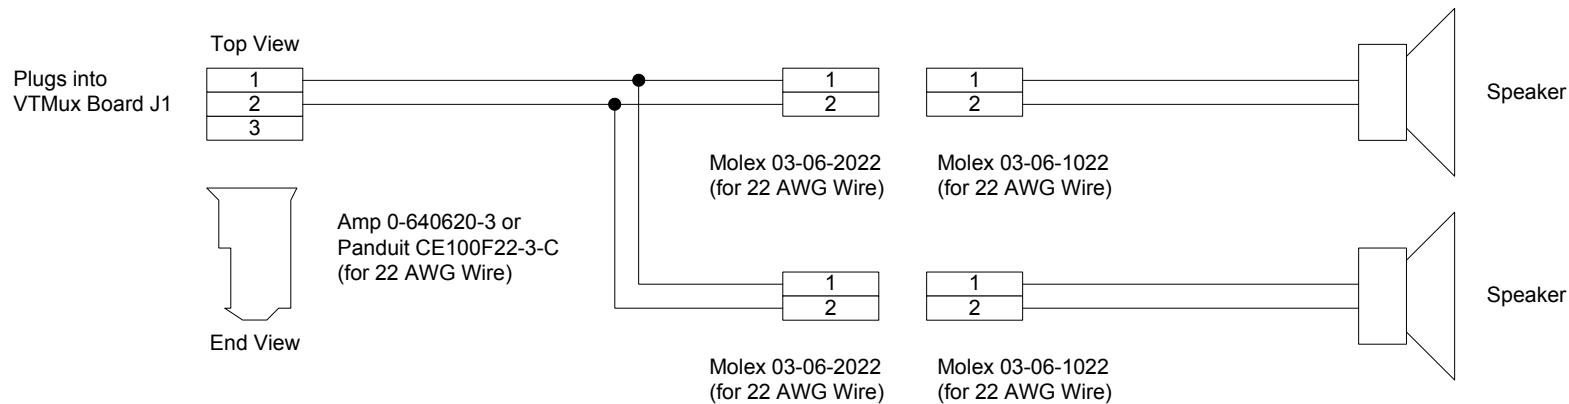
VTMUX BOARD J1 TO LOUDSPEAKER
